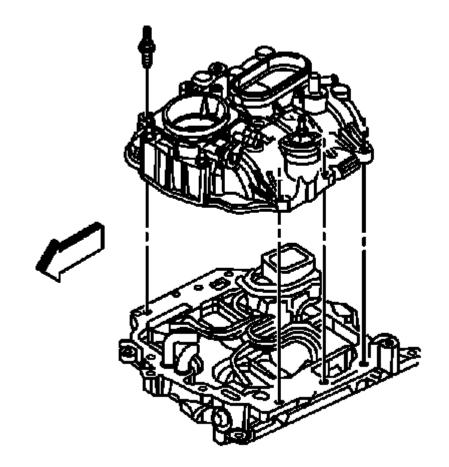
View Of Intake Manifold Upper Studs Courtesy of GENERAL MOTORS CORP.
